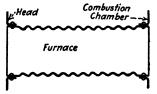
Sketch of Furnace Showing Connection to Head and Combustion Chamber
